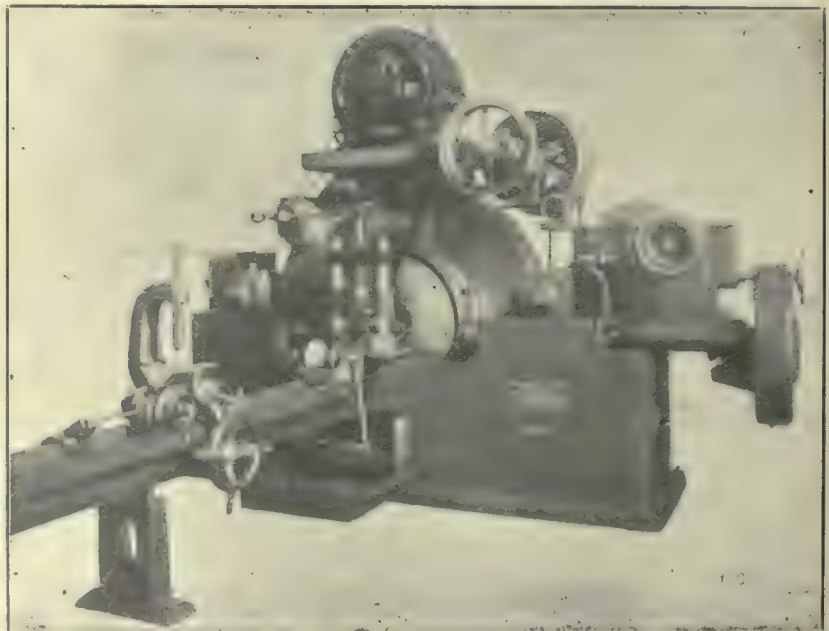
Front View No. 2-B Gorton Cutting-off Machine.
